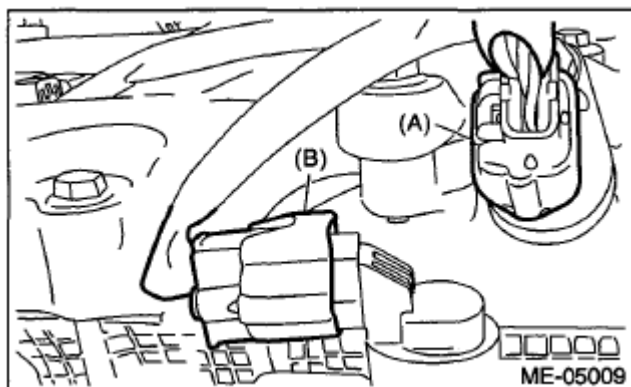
Identifying Exhaust Camshaft Position Sensor RH Connector And Exhaust Oil Flow Control Solenoid Valve RH Connector
